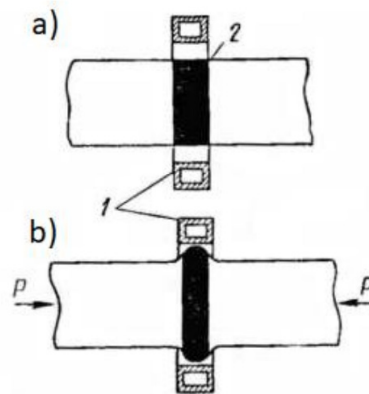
Scheme of welding without flashing: a - heating; b - sediment
